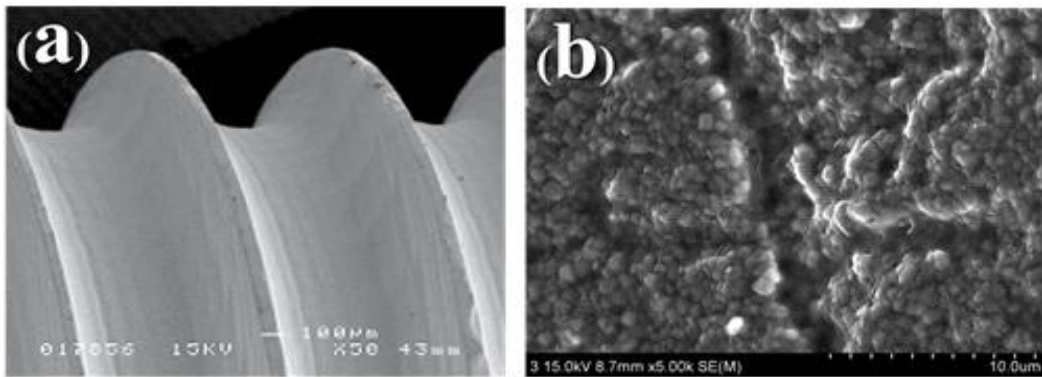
Surface morphology of fabricated zirconia implant by CAD/CAM mechanical machining; (a) implant surface and, (b) micro-cracking on sintered specimen.[31]
